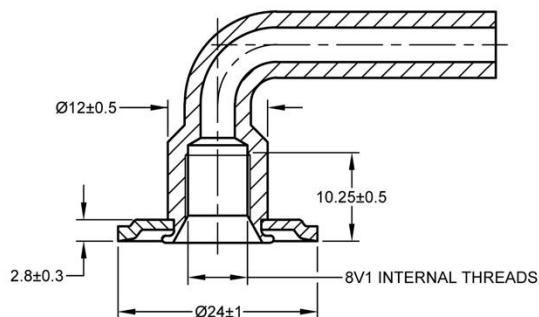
TUBELESS CLAMP-IN TRUCK AND BUS VALVE (GORMET TYPE- ROUND BASE)
